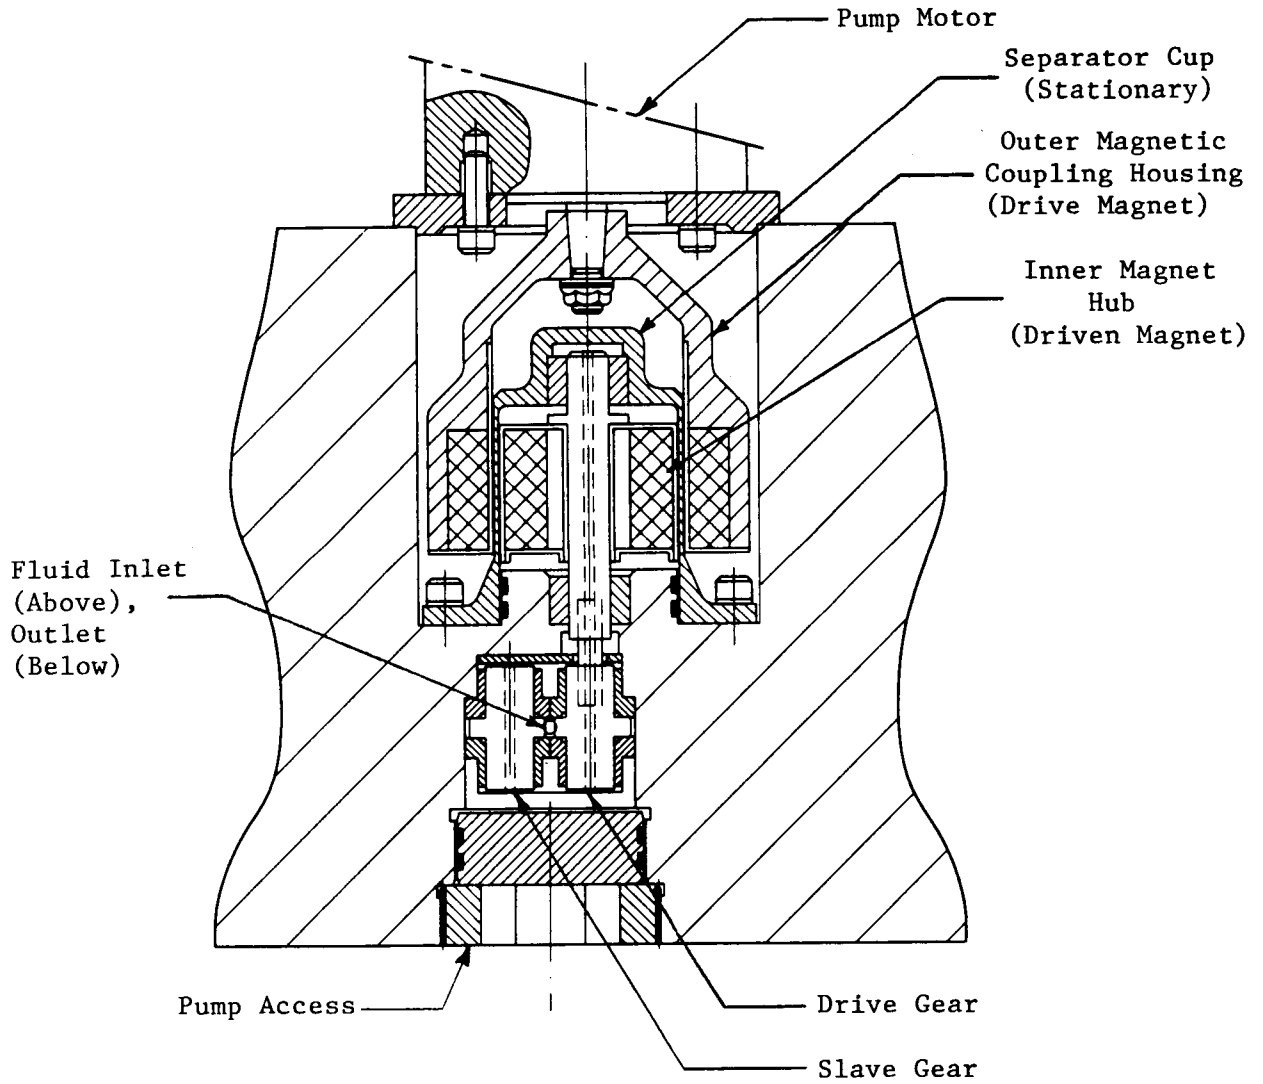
TCA CROSS SECTIONAL SCHEMATIC SHOWING MAGNETIC COUPLING AND GEAR PUMP
